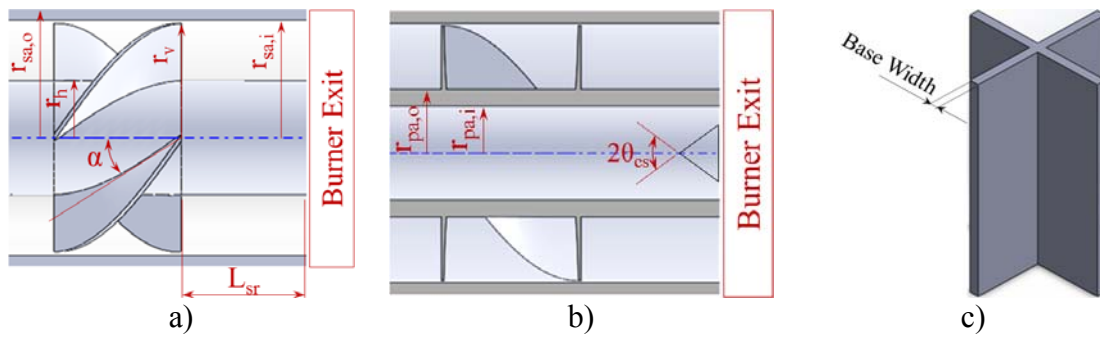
Illustration of: a) swirl burner components, b) cross-sectional view of a swirl burner, and c) base width of a coal spreader
